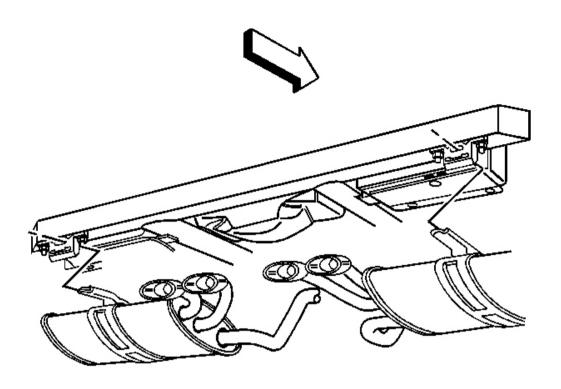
Hanger Muffler Blade Courtesy of GENERAL MOTORS CORP.
